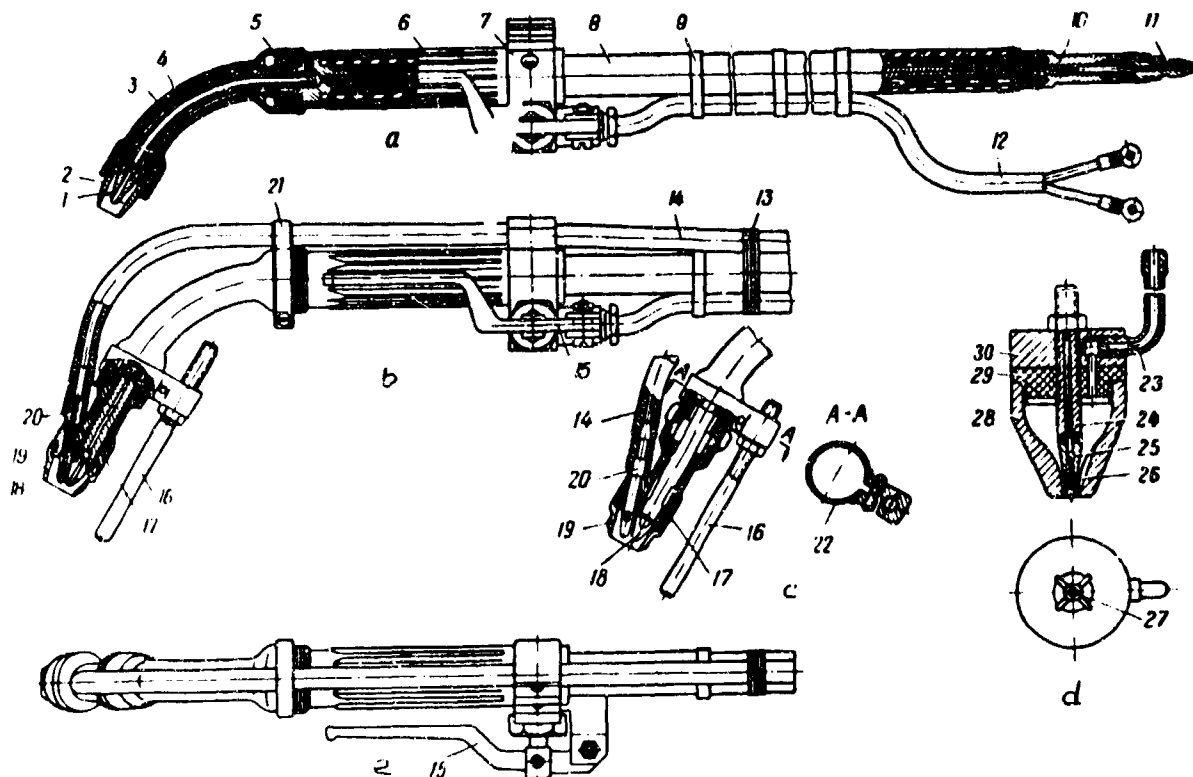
Head of Semiautomatic Machine for Underwater Welding and Cutting: a - head with welding attachment; b - head with attachment for cutting; c - cutting unit; d - cutting attachment with concentric delivery of oxygen; e - view from top; 1, 18 - current-delivering tips; 2 - nozzle; 3, 4, 23 - pipes; 5, 30, bushings; 6 - lever; 7 - starting unit; 8 - hose-cable; 9 - ring; 10 - spiral; 11 - adapter (nipple); 12 - multistranded lead of control circuit; 13 - lashing; 14 - oxygen hose; 15 - lever; 16 - pin; 17 - removable cutting fitting; 19 - nozzle of cutting attachment; 20 - oxygen nozzle; 21, 22 - clamps; 24, 25 - bronze bushings; 26 - keyway; 27 - X-shaped groove; 28 - bronze frame of fixture; and 29 - polyethylene ring.
